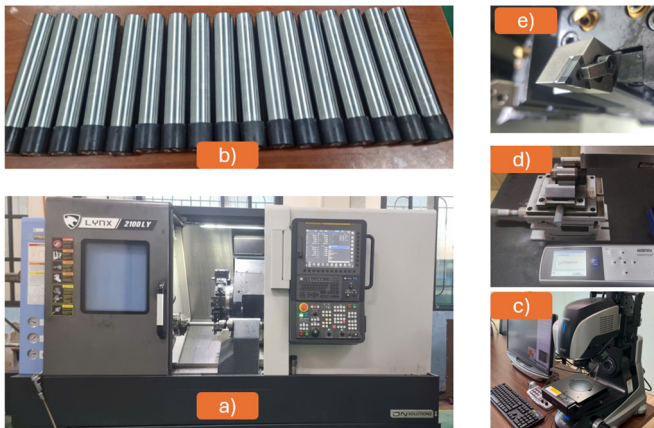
Experimental setup and measurement instruments used in the turning tests: (a) Doosan Lynx 2100LY CNC lathe; (b) Inconel 718 cylindrical workpieces; (c) Keyence VHX-7000 digital optical microscope for flank wear (V_b) measurement; (d) Surface roughness tester; (e) CBN cutting insert used in the experiments.
